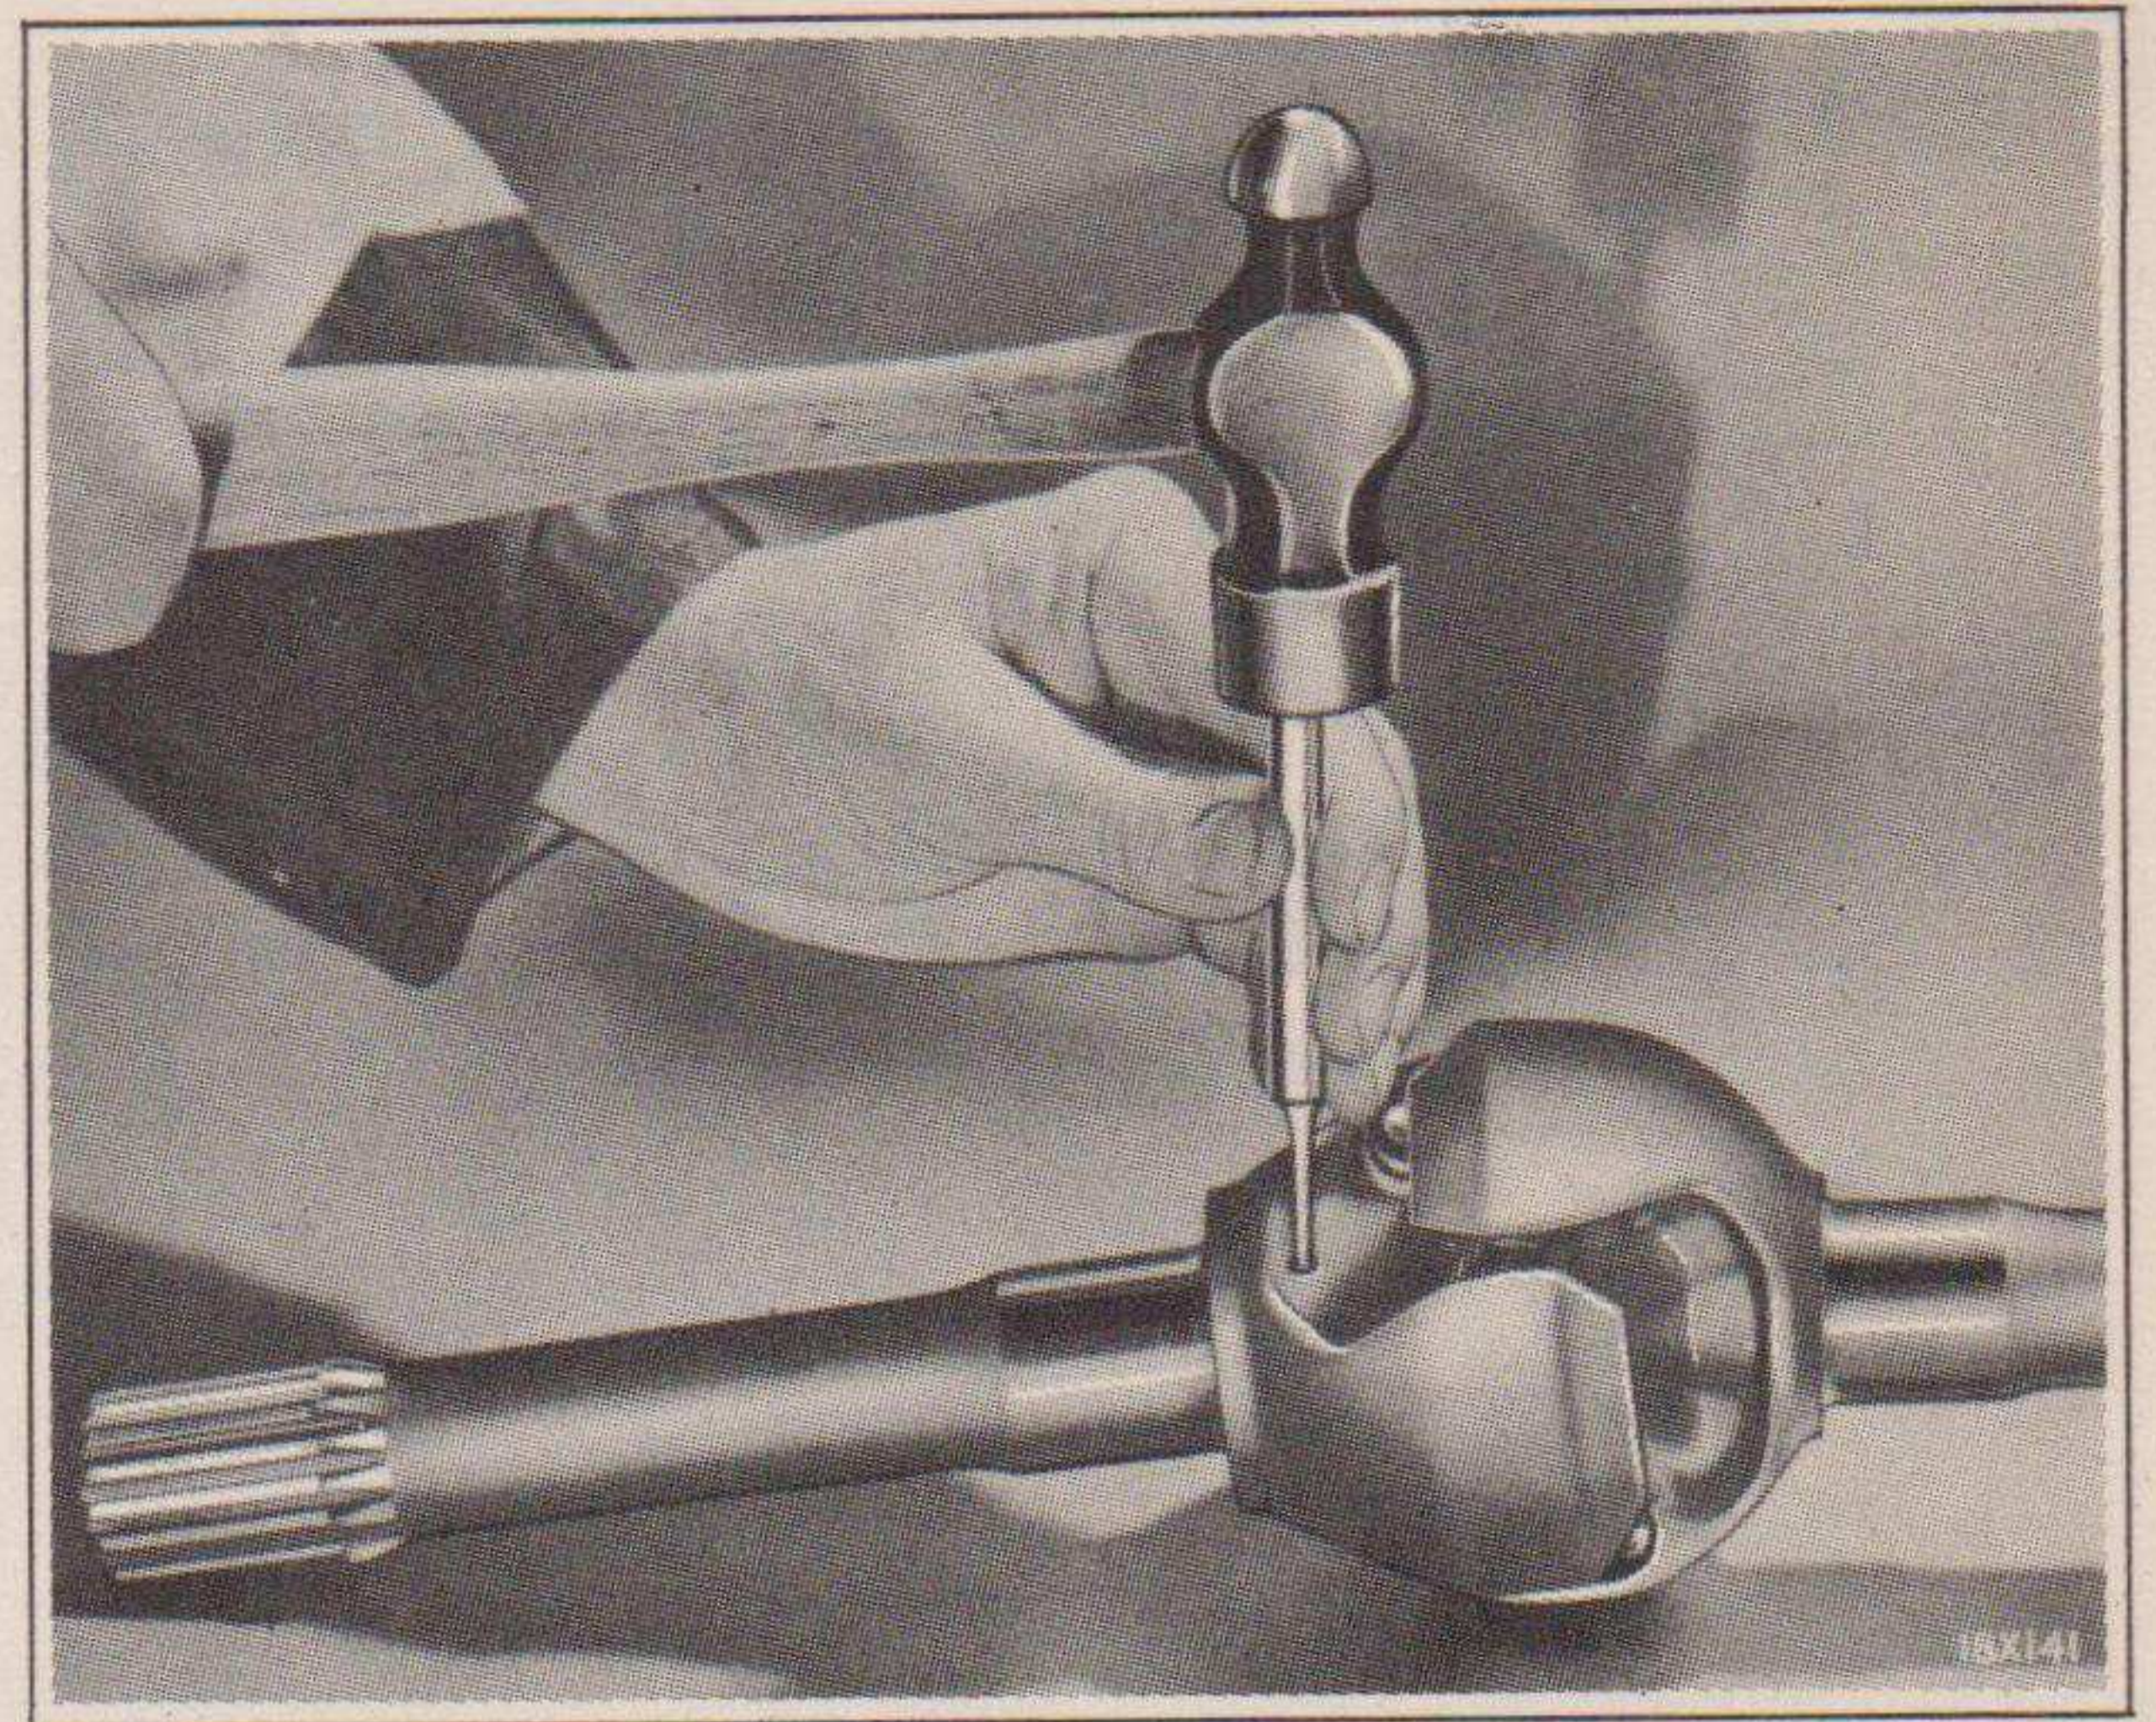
Removing Universal Drive Center Ball Pin Retainer Pin (Bendix-Weiss)
